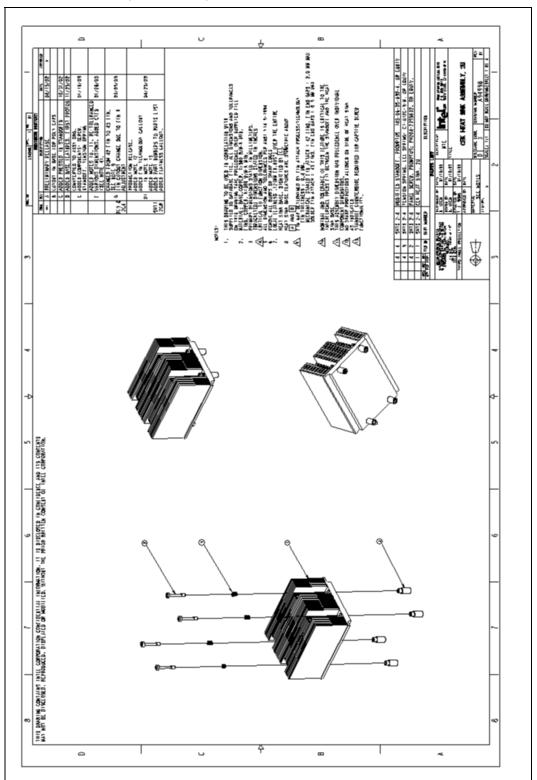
2U CEK Heatsink (Sheet 2 of 4)
